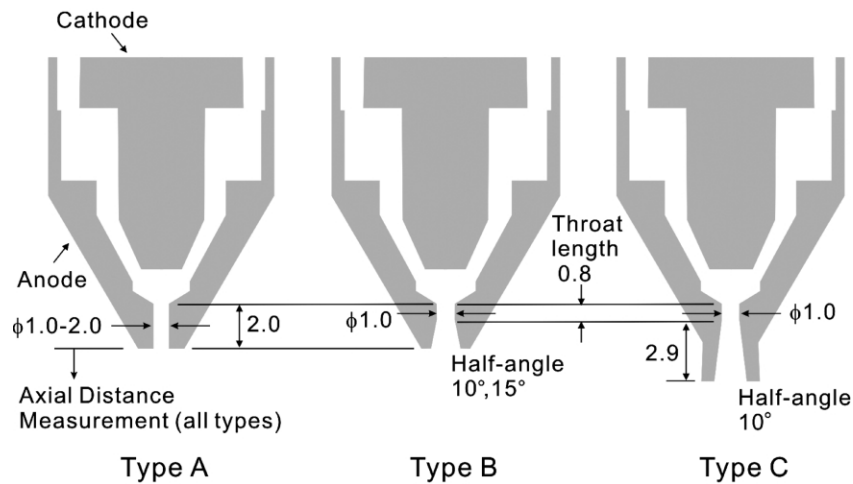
Cutaway views of the three types of arcjet nozzles investigated. Dimensions in millimeters. Swirl-inducing gas injectors omitted for simplicity.
